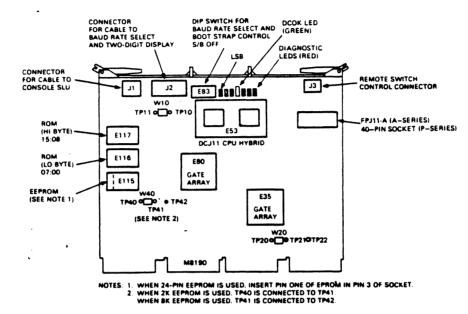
KDJ11-B JUMPER AND DIP SWITCH LOCATION
